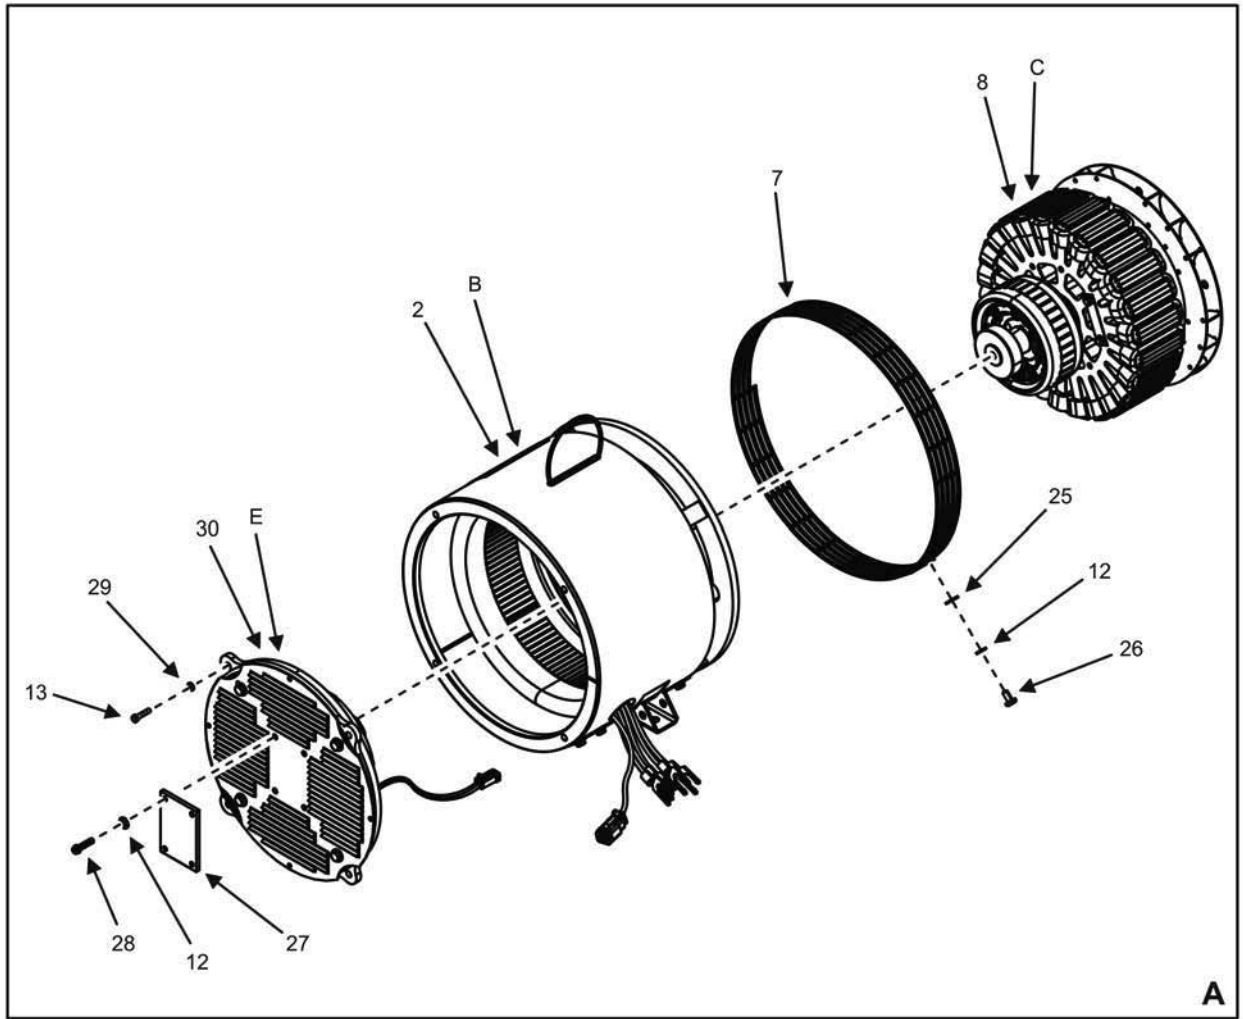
AC Generator Assembly, 400 Hz (Sheet 2 of 3).
